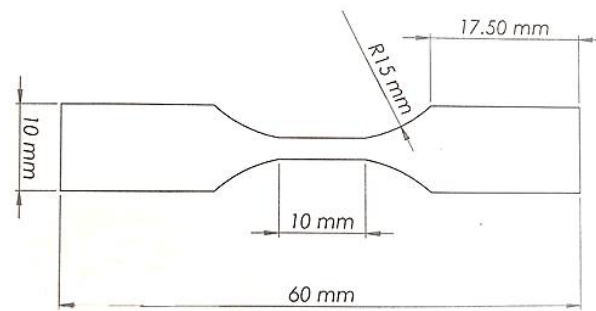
Specimen exploited for this project, in accordance with ASTM D638, even though dimensions may be prone to small changes because of the process of injection moulding
